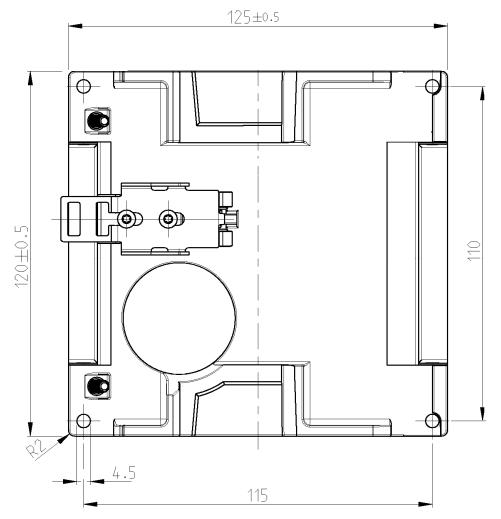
Dimension drawing rear view of the SCALANCE X116, X112-2
